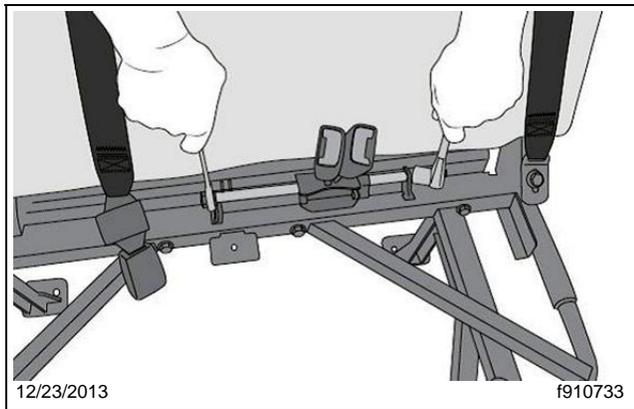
, Removing the Nut at the Shaft End, Sliding Buckles
